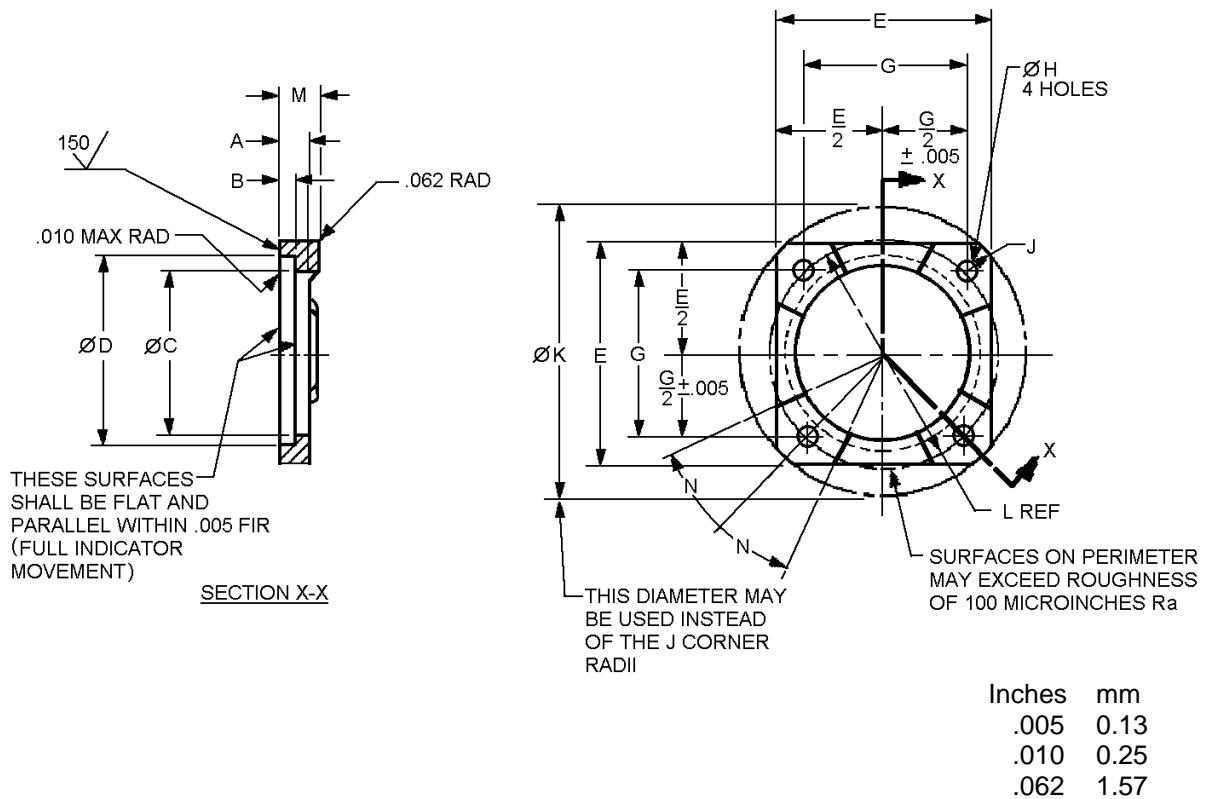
Swivel fitting flange type I rectangle size 8 through 32.
